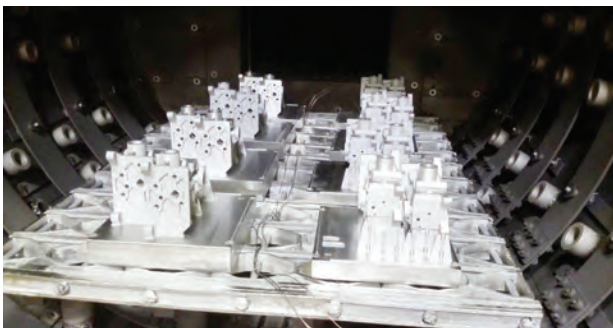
Heat treaters have found an ally in vacuum furnaces when it comes to processing intricate, near net shape AM parts.
